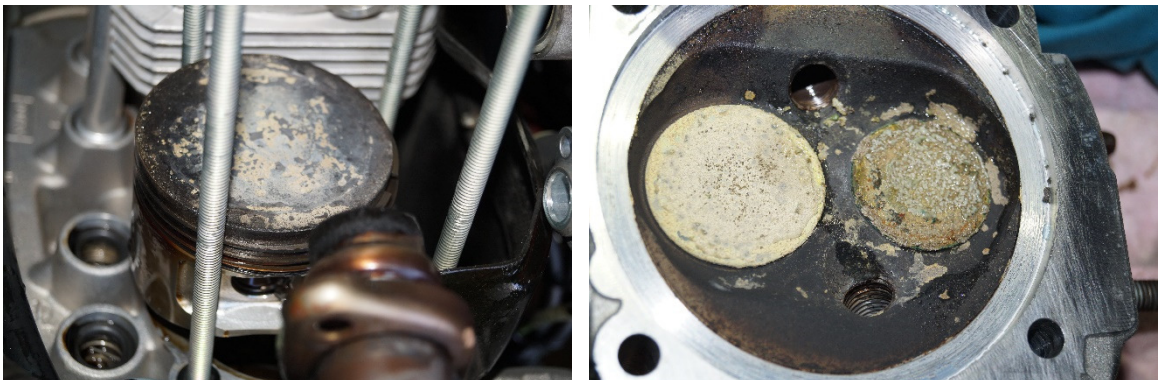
The piston of cylinder no. no 1 and cylinder head valves [source: PKBWL]
